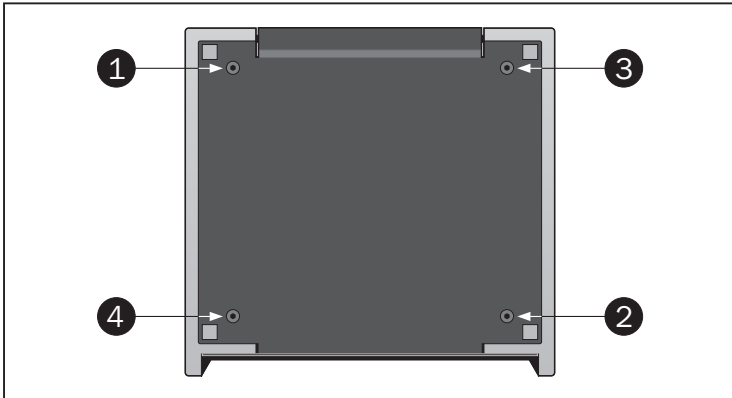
To remove the bottom panel, remove the four screws at the positions shown. The numbers indicate the order in which they should be tightened when panel is replaced.
